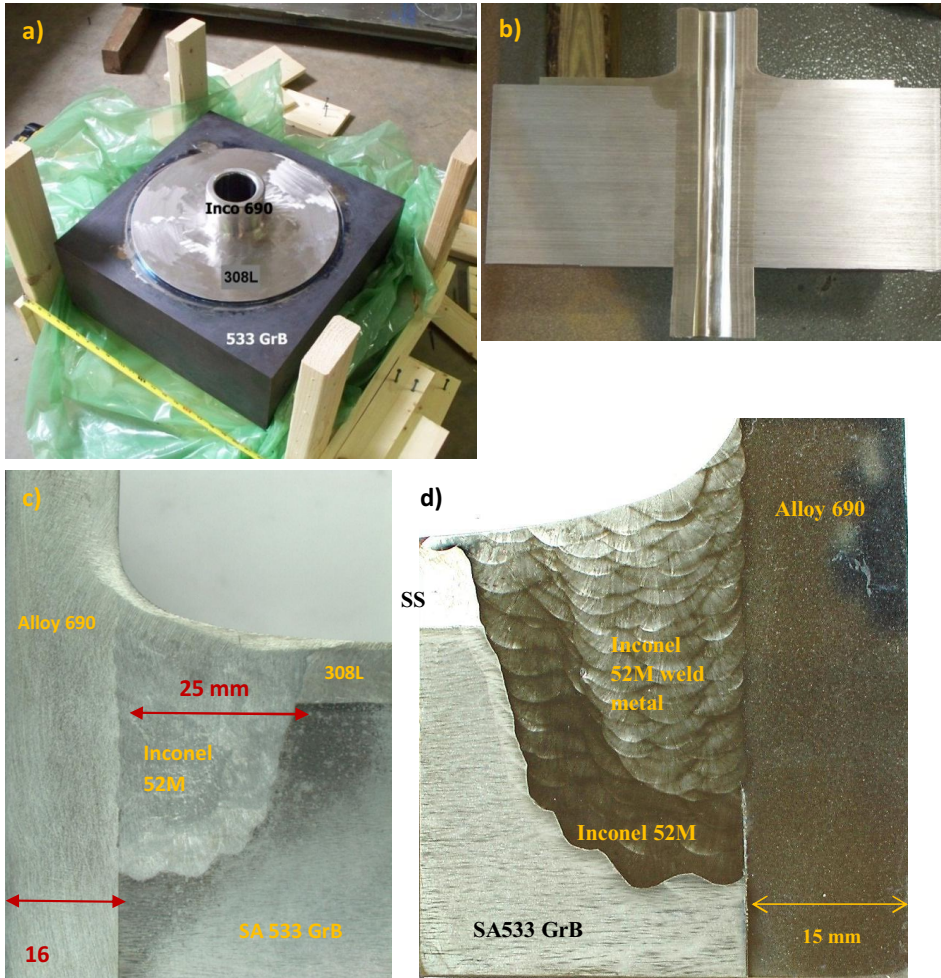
Views of the sample PG&E mock-up with a) broad sample showing the Alloy 690 pipe inside the LAS SA533 GrB plate with the SS 308L cladding, b) the sample cut in half, c) a closer view of the sample cut in four showing Inconel 52M weld metal and d) the sample cut, polished and etched.
